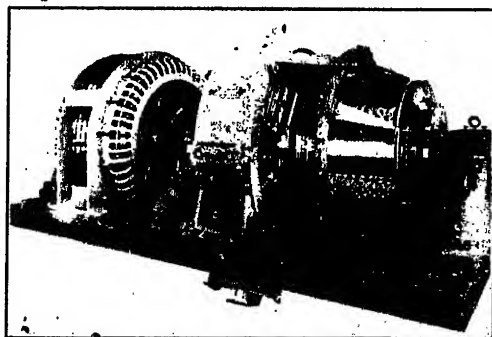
SHOWS A WELDED MOTOR-GENERATOR SET THE ONLY CASTINGS USED BEING THE PEDESTAL BEARINGS. EVEN THE BRUSH RIGGING FOR THE GENERATOR IS OF WELDED STEEL CONSTRUCTION. THIS SET IS RATED AT 750 KW., 900 REV. PER MIN.
